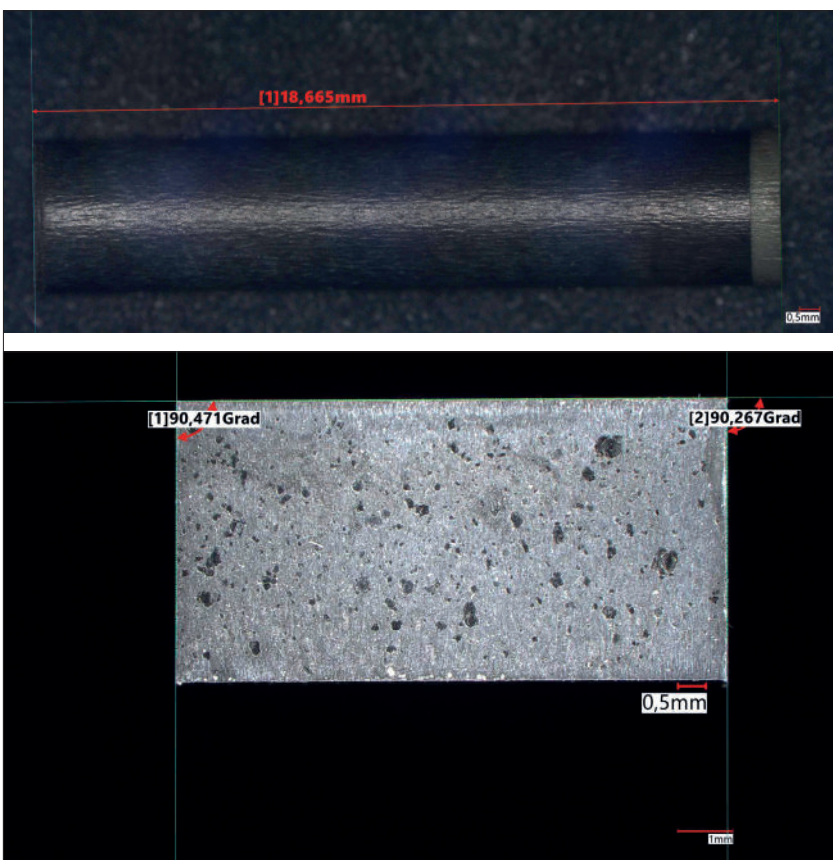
Examples of vertical cutting edges. Top image: Drill core through 18,665 mm thick SiN with a calculated cutting edge angle of 89,83°. Bottom image: Cuboid made of 5 mm thick SSiC with an average cutting edge angle of 90,369°
